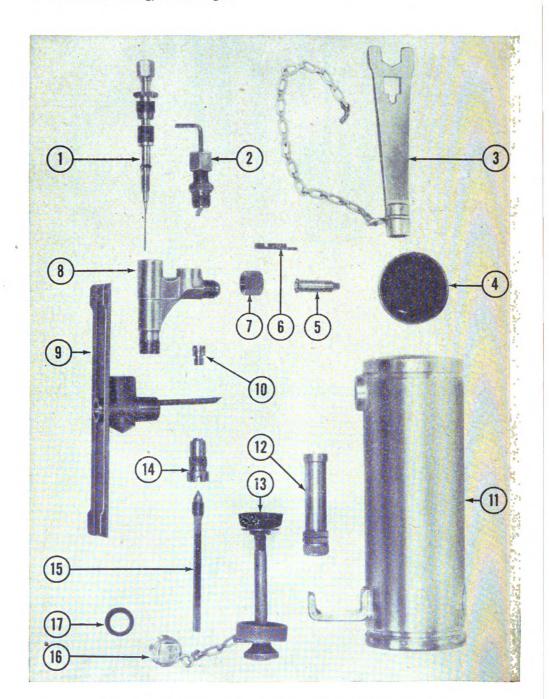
Parts of burner, one 2,500 B.t.u. head-Item No. 9R10005.
